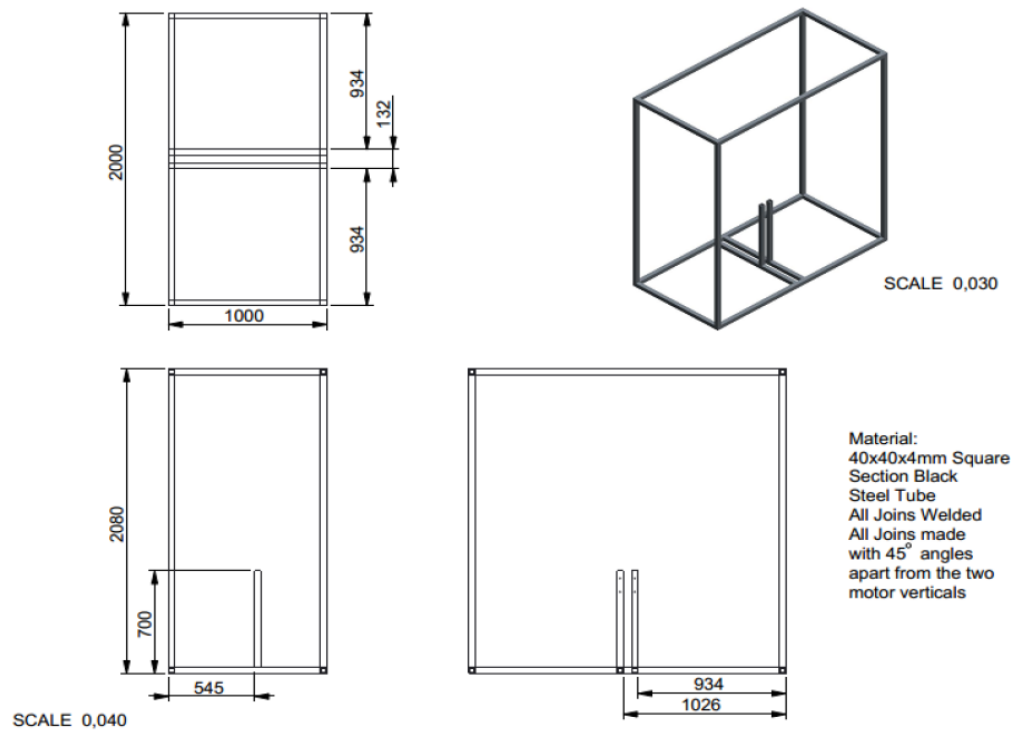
CAD drawings of the frame: 3D, front and right views of the bottom part.
